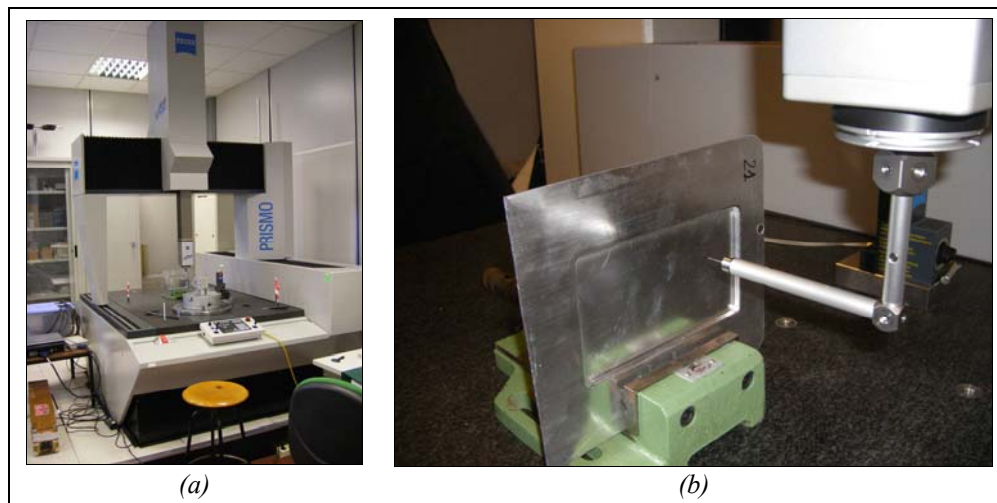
(a) CMM Prismo machine at DIMEG Lab; (b) measuring the sheet metal thickness.
